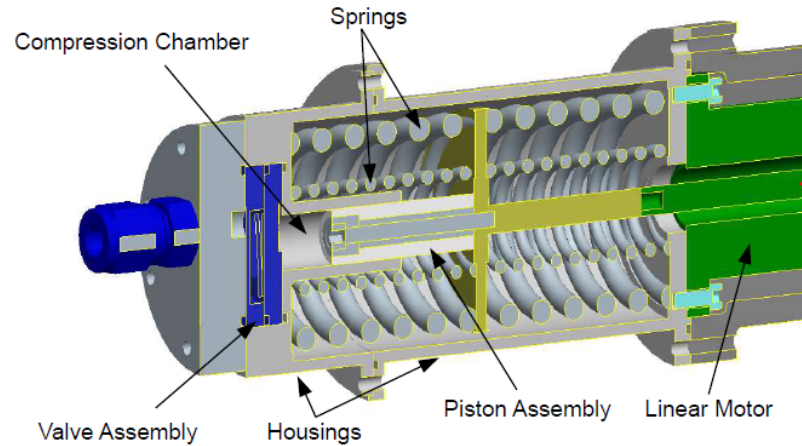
Sectional view of the prototype linear compressor [13].
